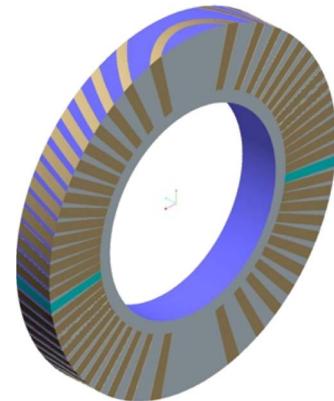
Cross section of a single lamination of coils ribs and spar.
